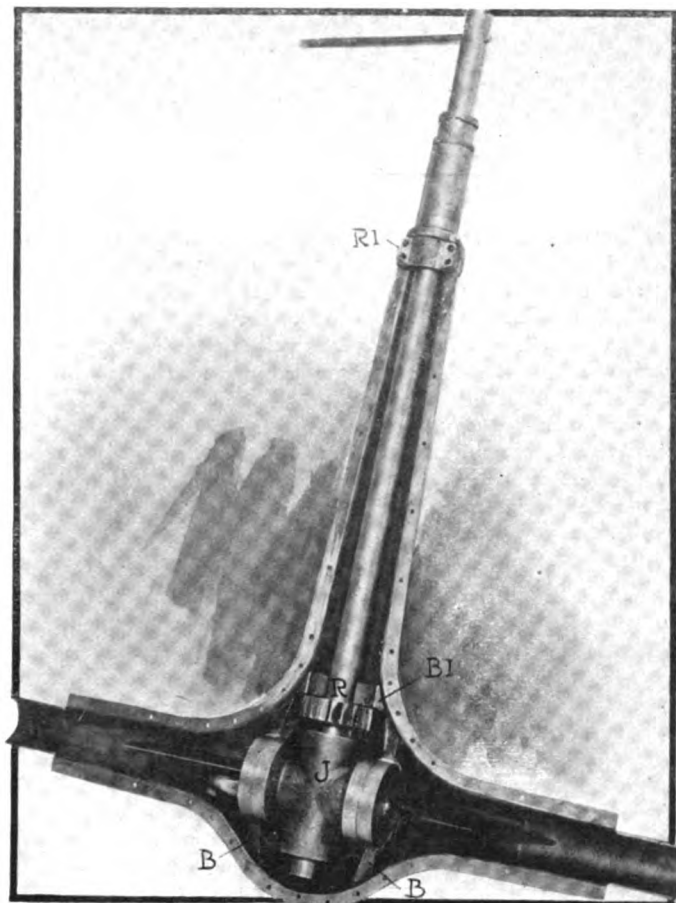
Showing method of hand-reaming of pinion bearing in Fiat rear axle. During this operation both stampings are firmly bolted together
